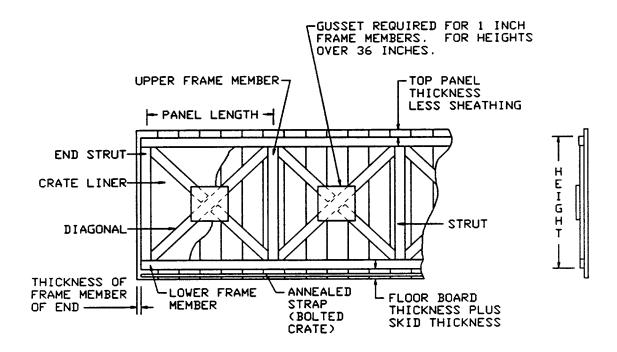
Fabrication of tops (narrow and intermediate) (MIL-C-104).
